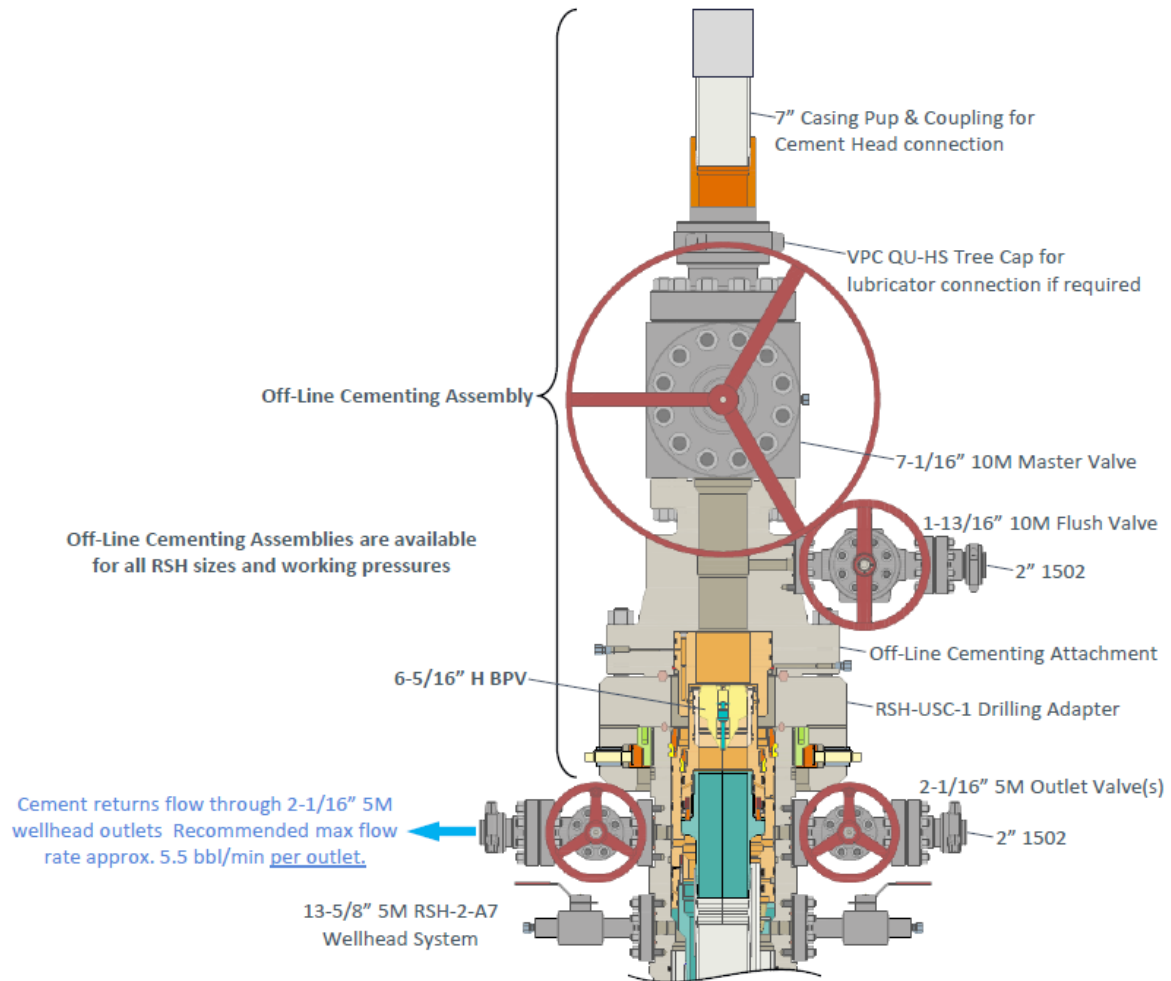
Vault 7" 5M offline cementing tool. Pressure rating limited by the lesser of 5M tool rating or the 7" pup joint and casing.
